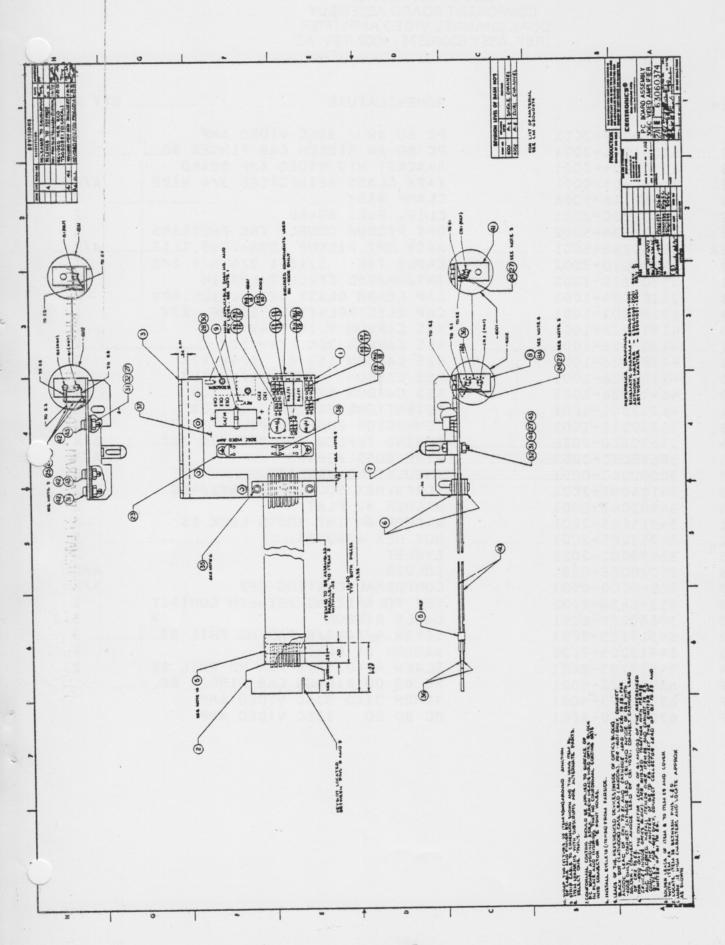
P.C. BOARD ASSEMBLY, 306C VIDEO AMPLIFIER
